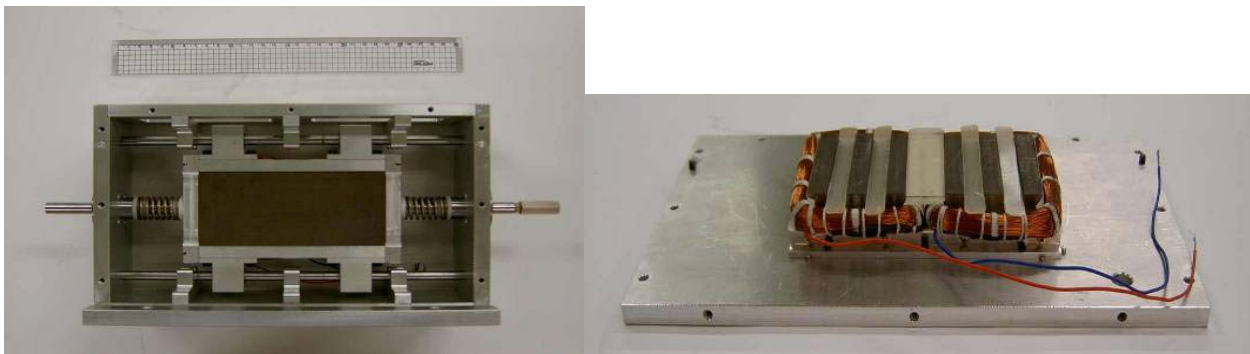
Mover with one side stator assembly and stator with coils [Bol 04].
